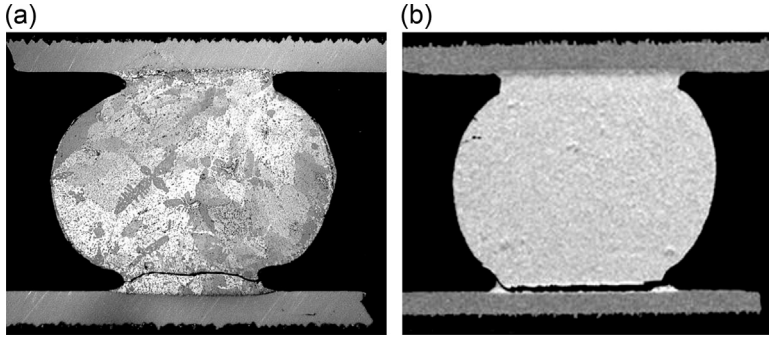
Cross-sections of solder ball joints damaged by drop impact. (a) Sn–37Pb ball on Cu pad with crack in bulk solder. (b) Lead-free Sn–1.0Ag–0.1Cu ball on Cu pad with crack along bonding interface.
